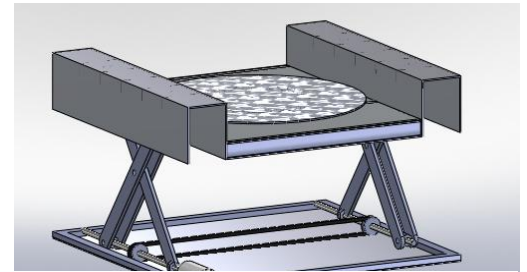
SolidWorks model of valley design with drive shaft and pulley/gear system
